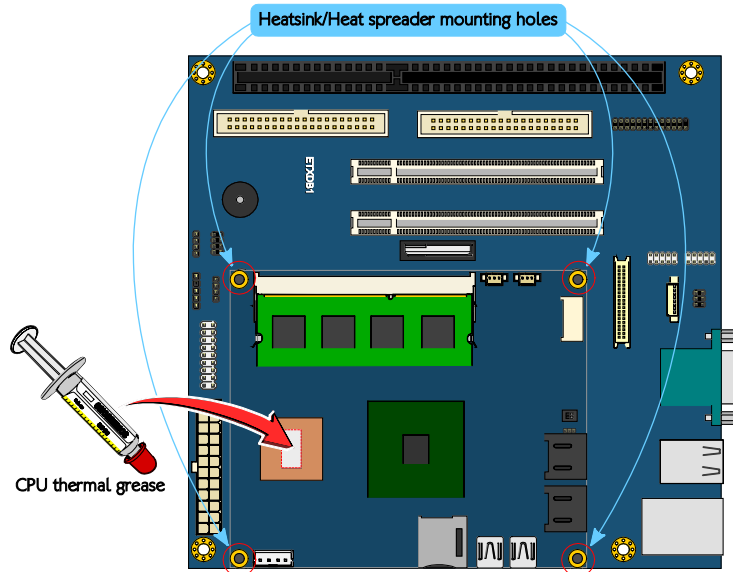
Heatsink/heat spreader's mounting holes on VIA ETX-8X90 module
